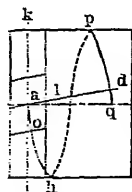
Pitch cylinder for large-angle spiral gear.
